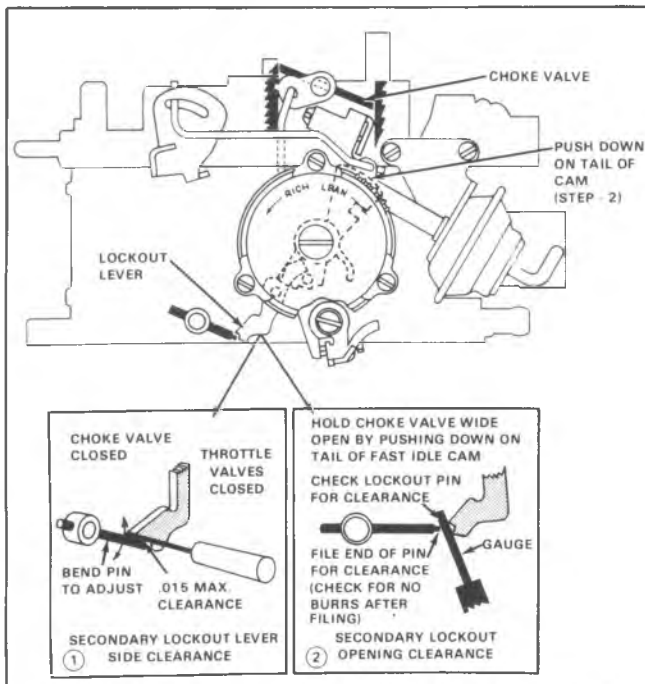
Secondary Throttle Valve Lock-Out Adjustment
